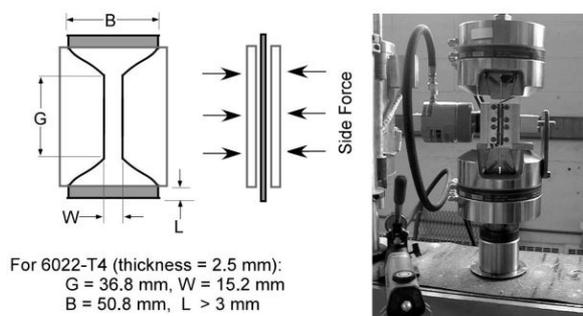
Boger’s schematic representation of the sheet metal specimen and uniaxial tension/compression tool
